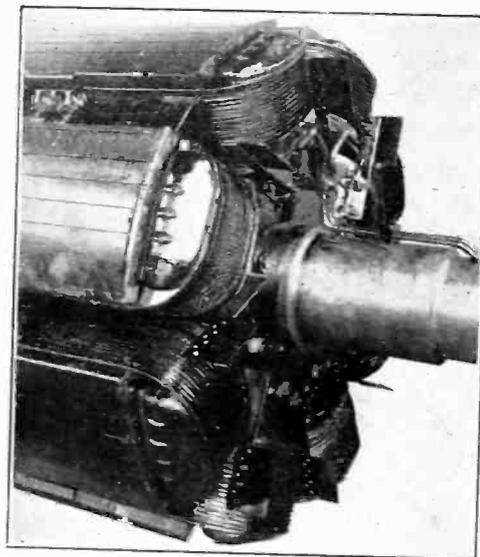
ROTOR OF 7500-KV-A., 900-REV. PER MIN.
